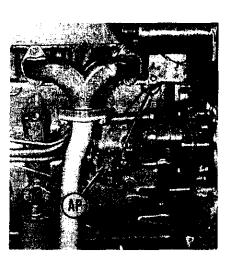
View of B-275 tractor showing the auxiliary fuel pump (AP) used when tractor is equipped with an injection pump having a mechanical governor. B-414, 354, 364 and 384 tractors are similar.
